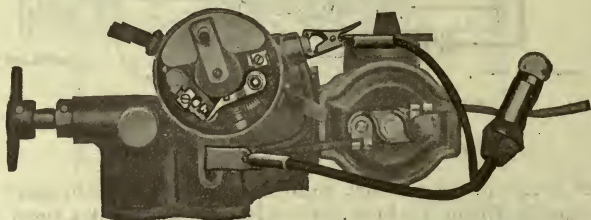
Ignition Distributor with Test Lamp Attached—Ground Return System. Rotor in position for Spark to occur in No. 1 Cylinder.
